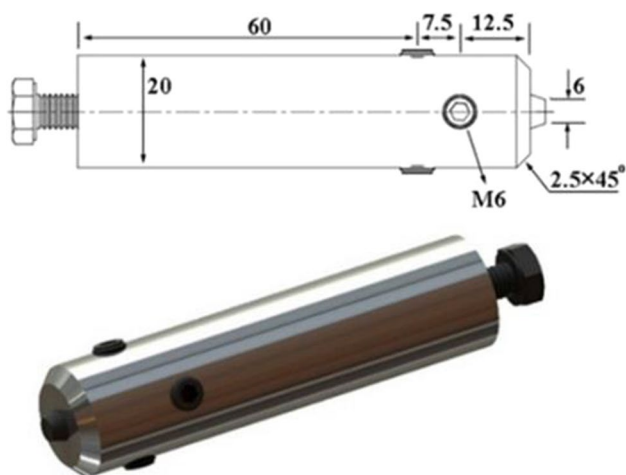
Schematic design of tool used for welding processes (all dimensions are in mm)
